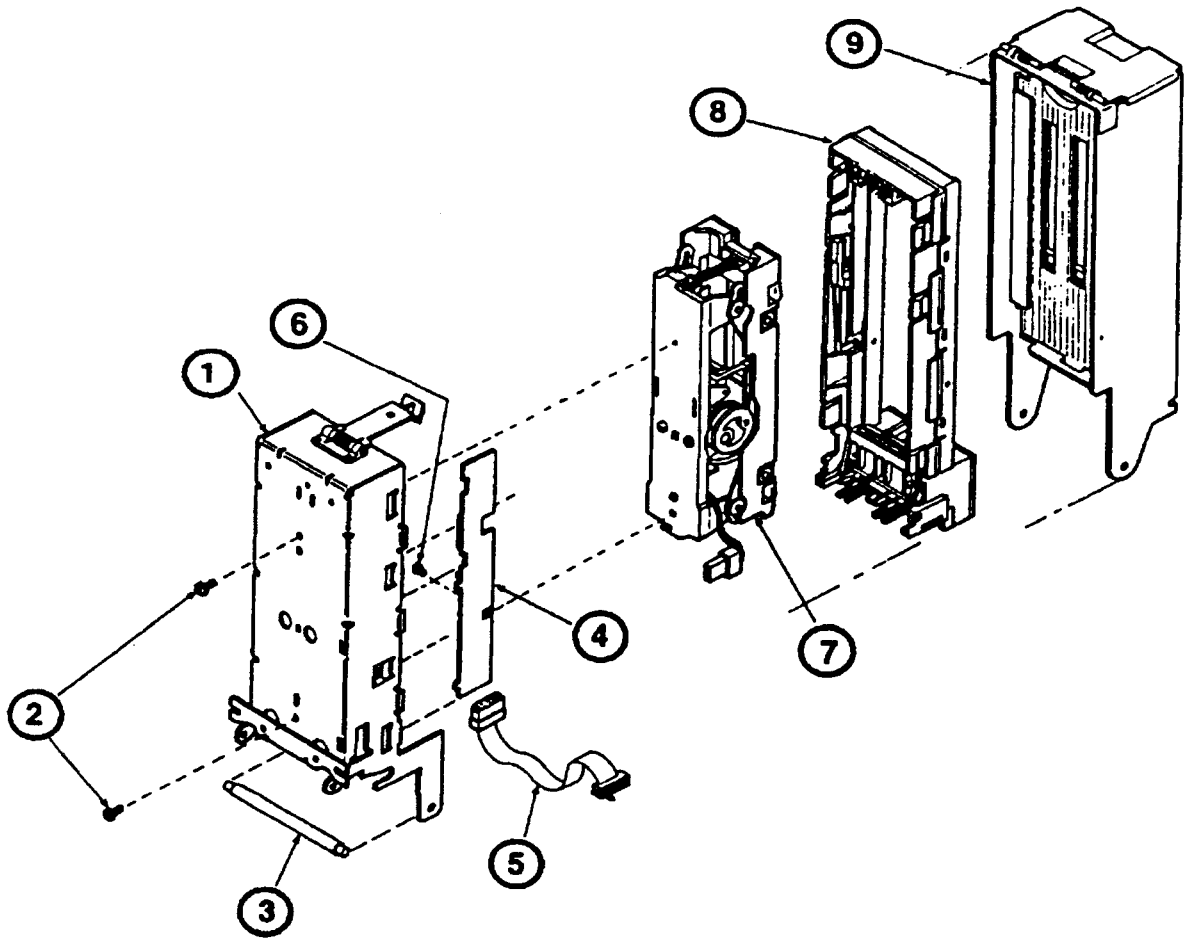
Magazine/Stacker Housing Assembly Breakdown
